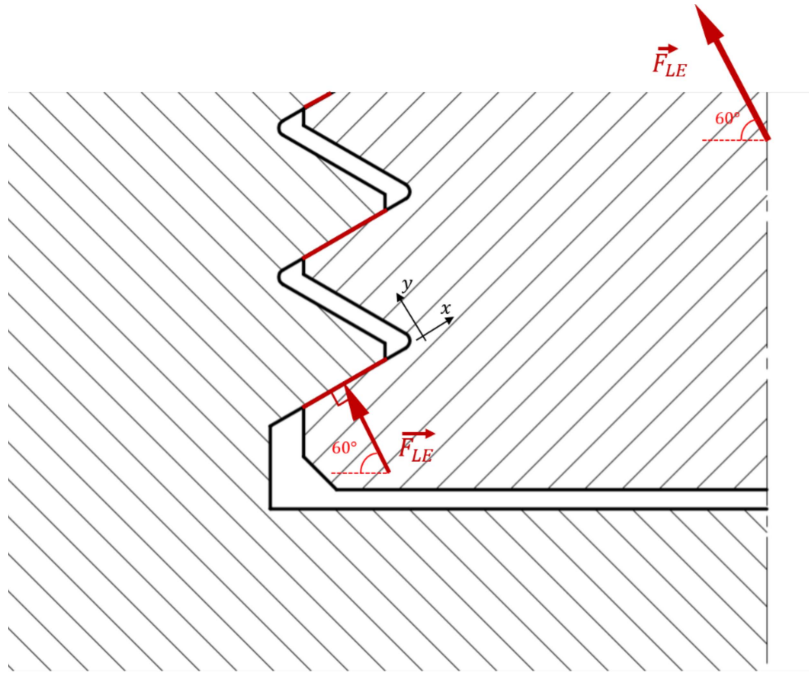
Pressure on the Thread Fillet Surfaces for the Lifting Eye Bolted Connection
